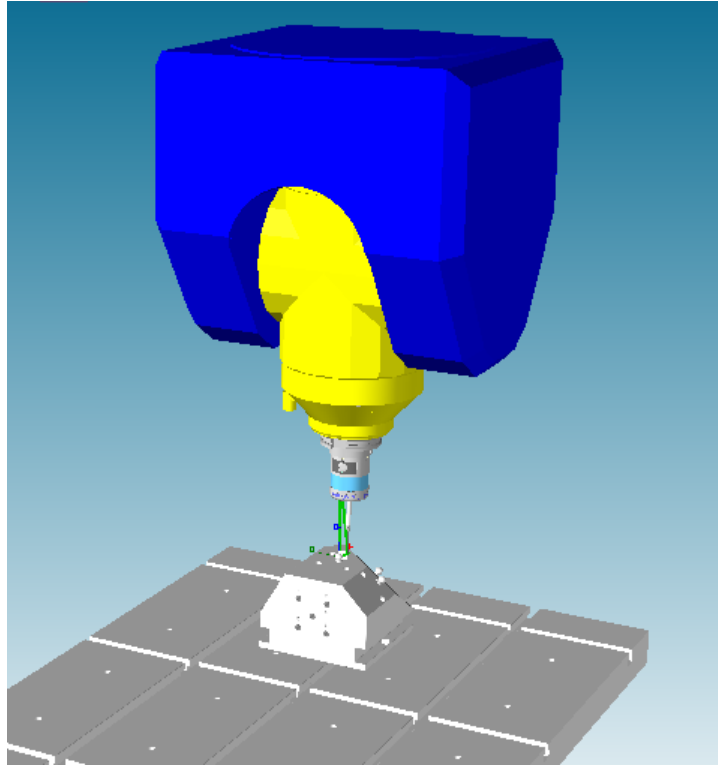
A0C0 Machine Spindle Measurement Orientation.
